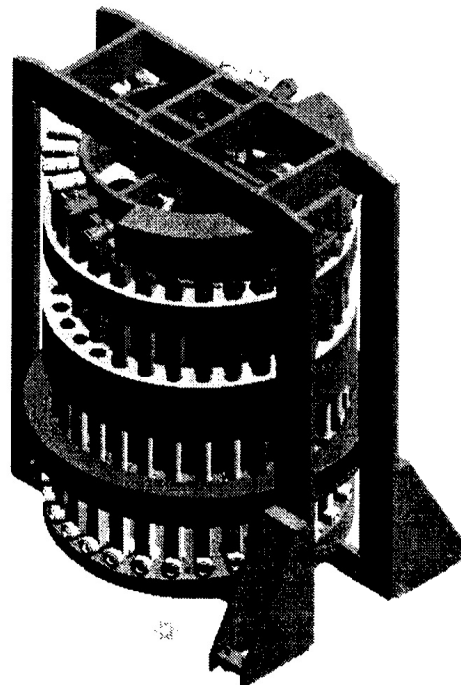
Design of the 5.4-inch Diameter Mold Rotary Press
